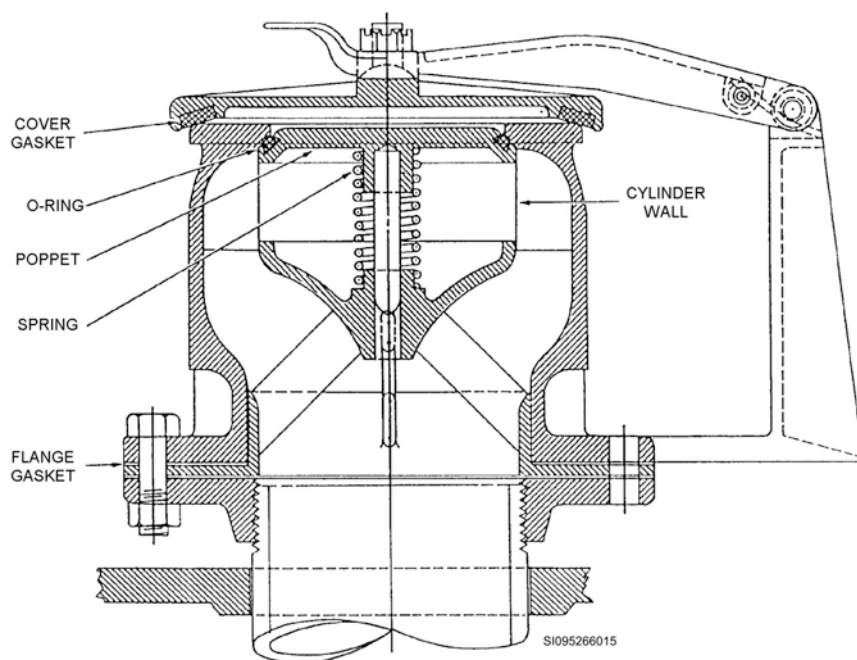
Hydrant outlet. (By courtesy of Cla-Val Co.)
